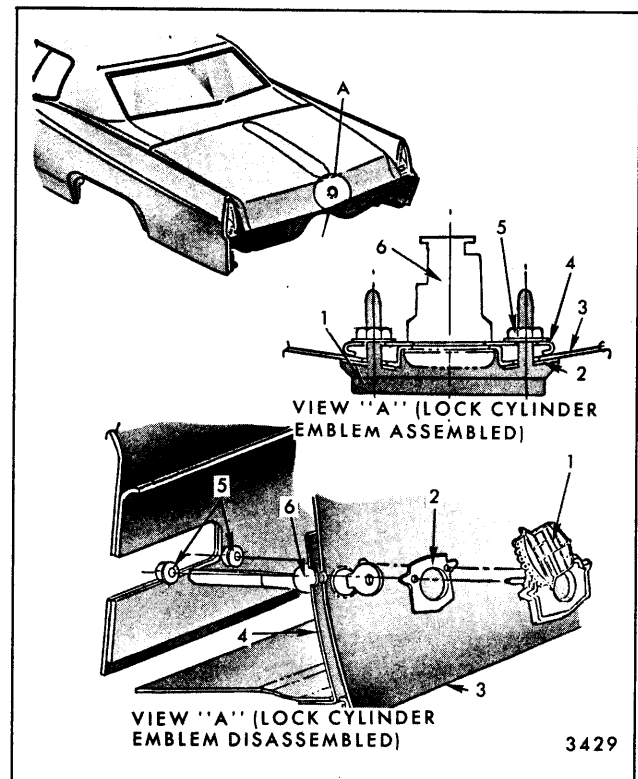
Lock Cylinder Removal - Cadillac "C and E" Styles
